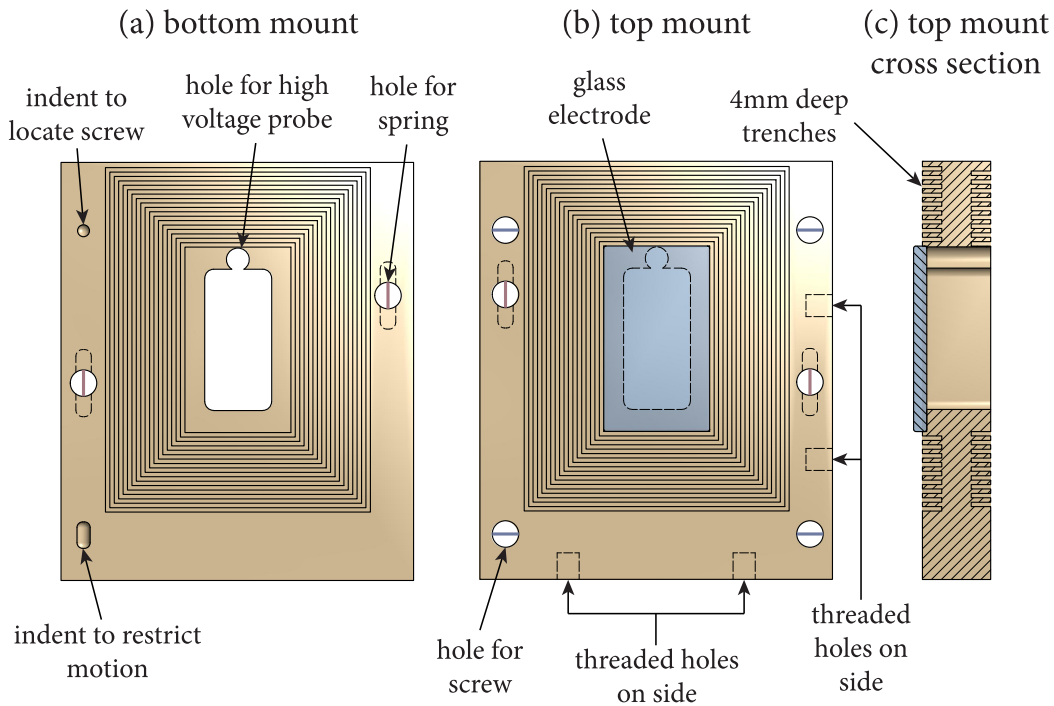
Inner surfaces of the (a) bottom electrode mount and (b) top electrode mount. In (c) a cross-sectional view of the top mount is shown. The horizontal blue lines indicate the holes through which screws are placed, whilst the vertical purple lines show where springs are positioned.
